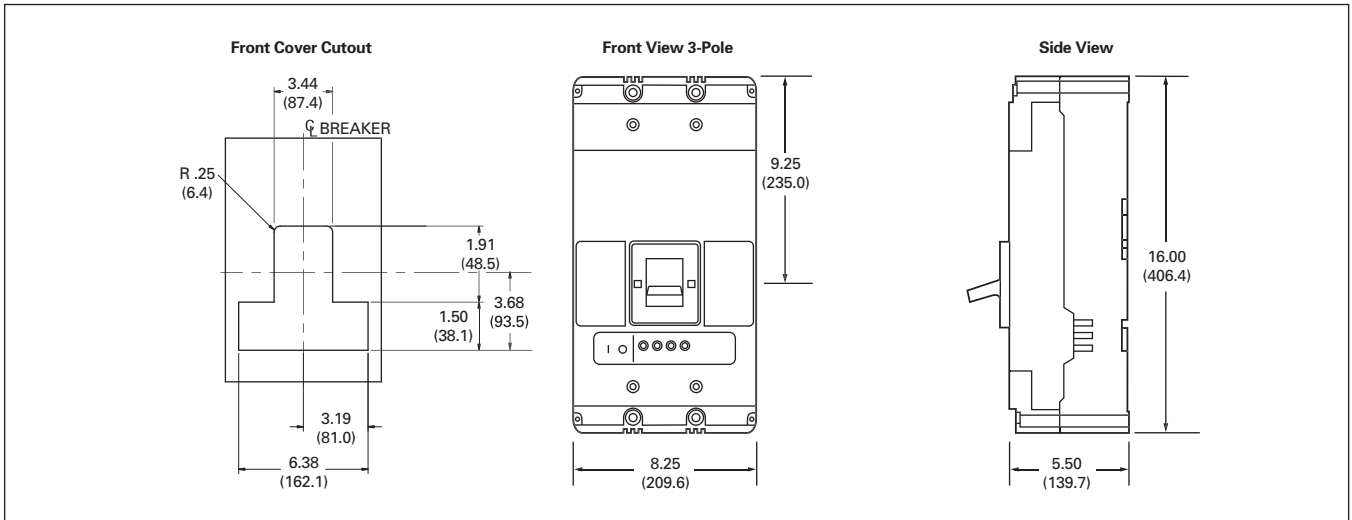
NG-Frame — Dimensions in Inches (mm)
